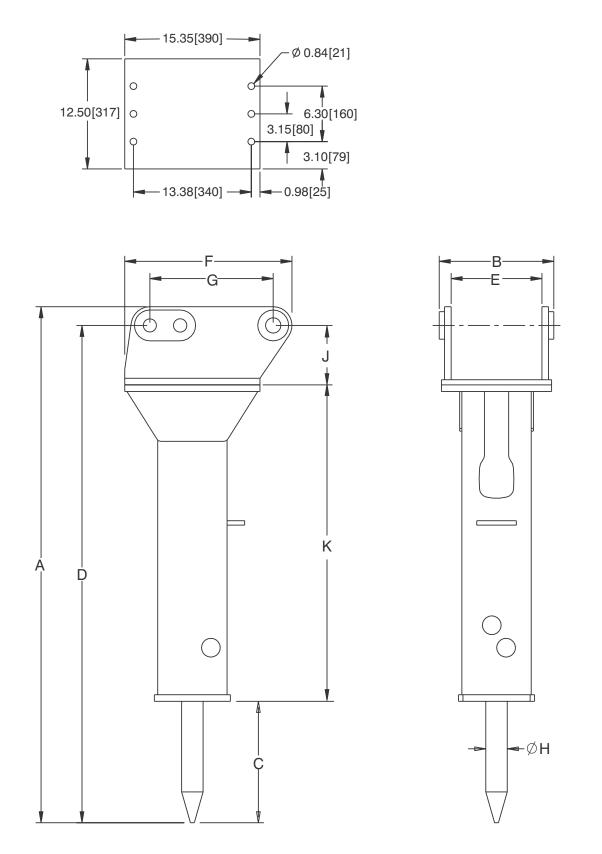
Typical Street Hammer Dimension Drawing Shown with BCS Universal Mounting Configuration
